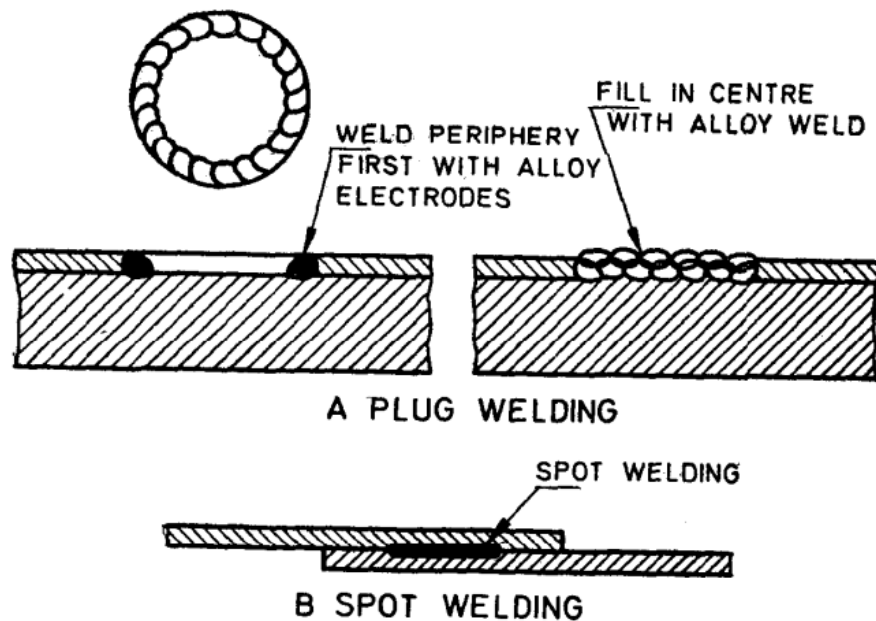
WELDS FOR FIXING OF LINING SHEETS
